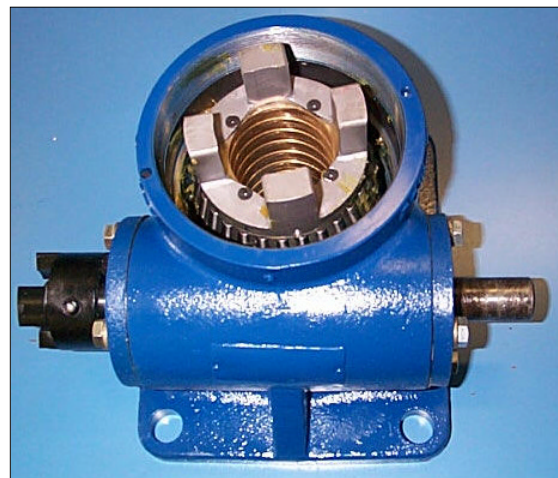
Rotator and Primary Nut Installed in Jackscrew Housing
